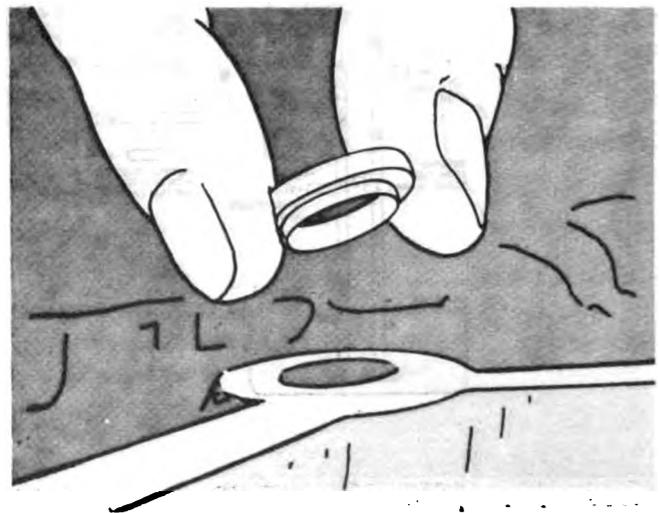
Install The Jacobs Brake Steel Washers.
